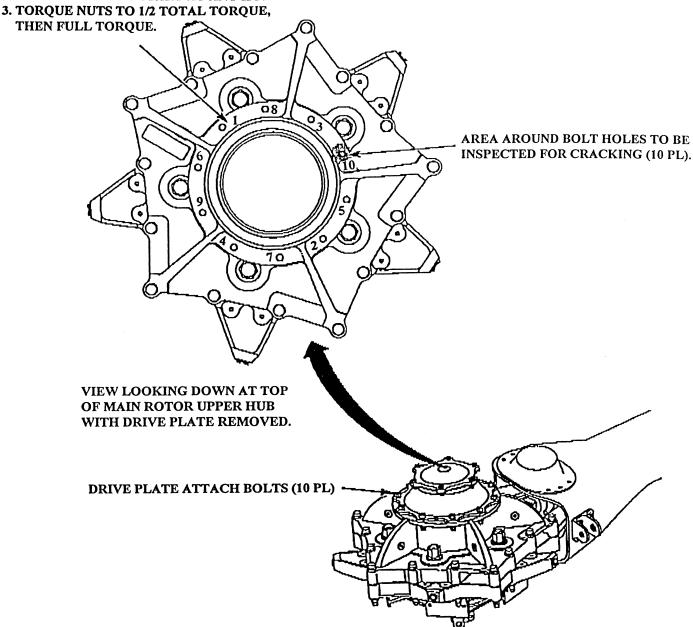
Main Rotor Upper Hub Assembly Inspection.
